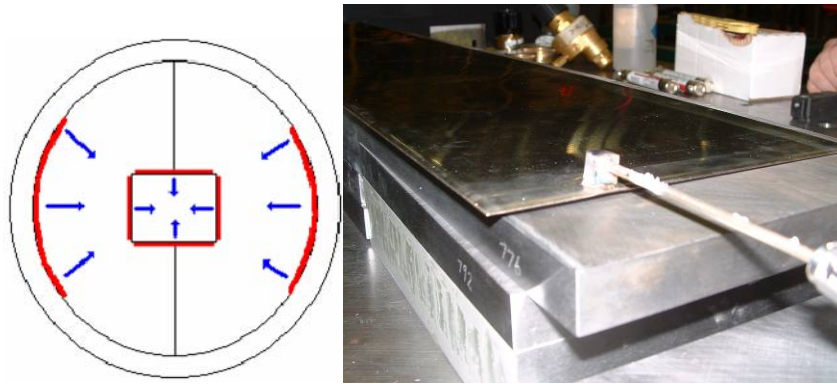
Bladder preload. Right, bladder locations in red. Left, stainless steel bladder.
